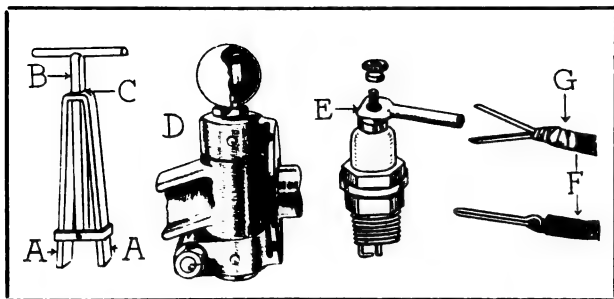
A, B, and C, Members of Home-Made Adjustable Socket Wrench; D, Protection for Oil and Grease Cups; E, F and G, Components of Improved Quick Detachable Terminal for Wiring.
